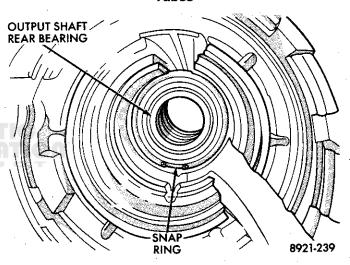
Removing Output Shaft Rear Bearing And Snap Ring
